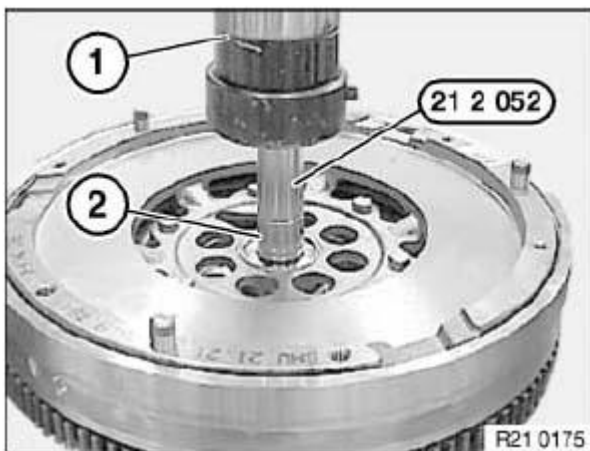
Identifying Special Tool (21 2 052), Roller Bearing And Hydraulic Press
